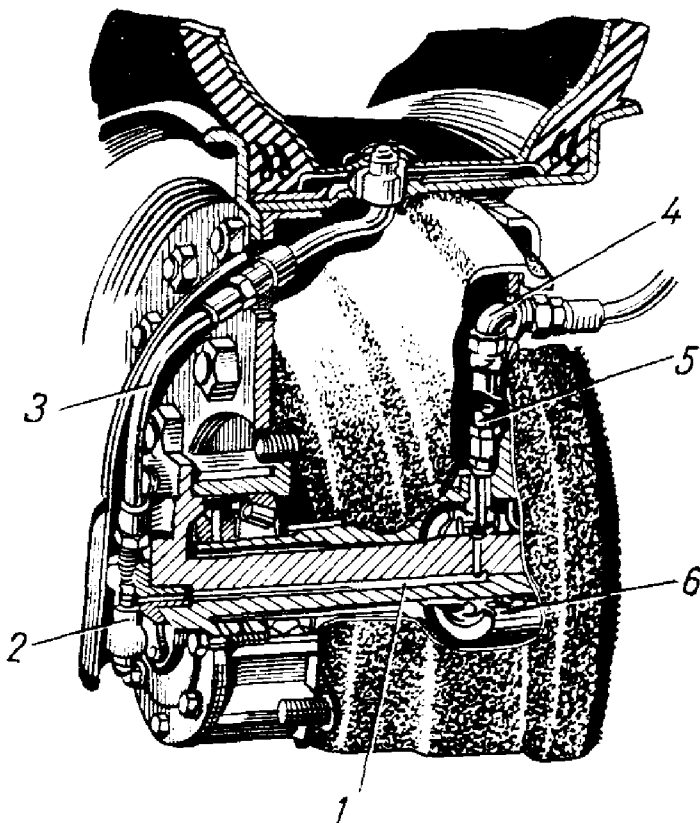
AIR SUPPLY TO WHEEL TYRE THROUGH AXLE SHAFT
